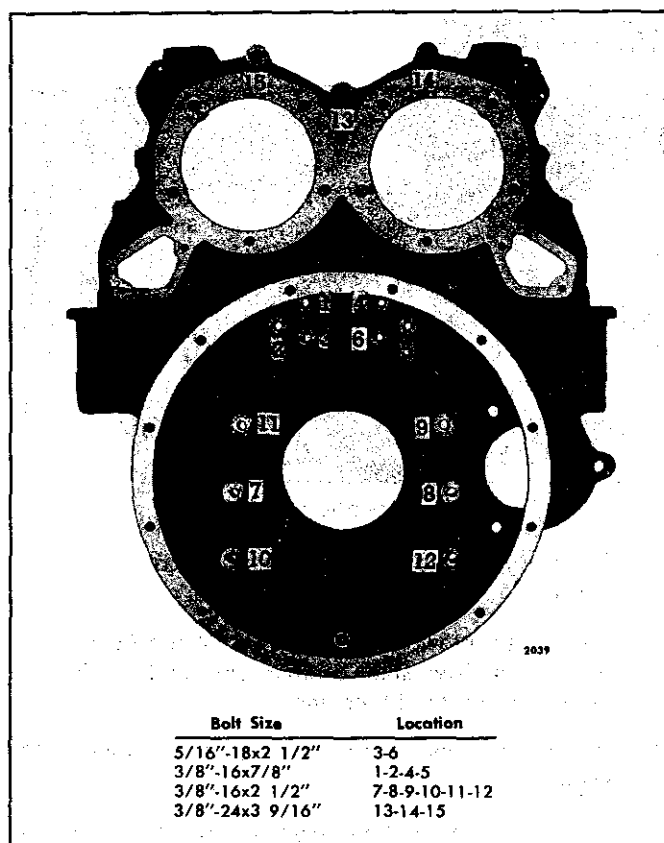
Flywheel Housing Bolt Sizes and Tightening Sequence (Operation 1)—In-Line Engine
